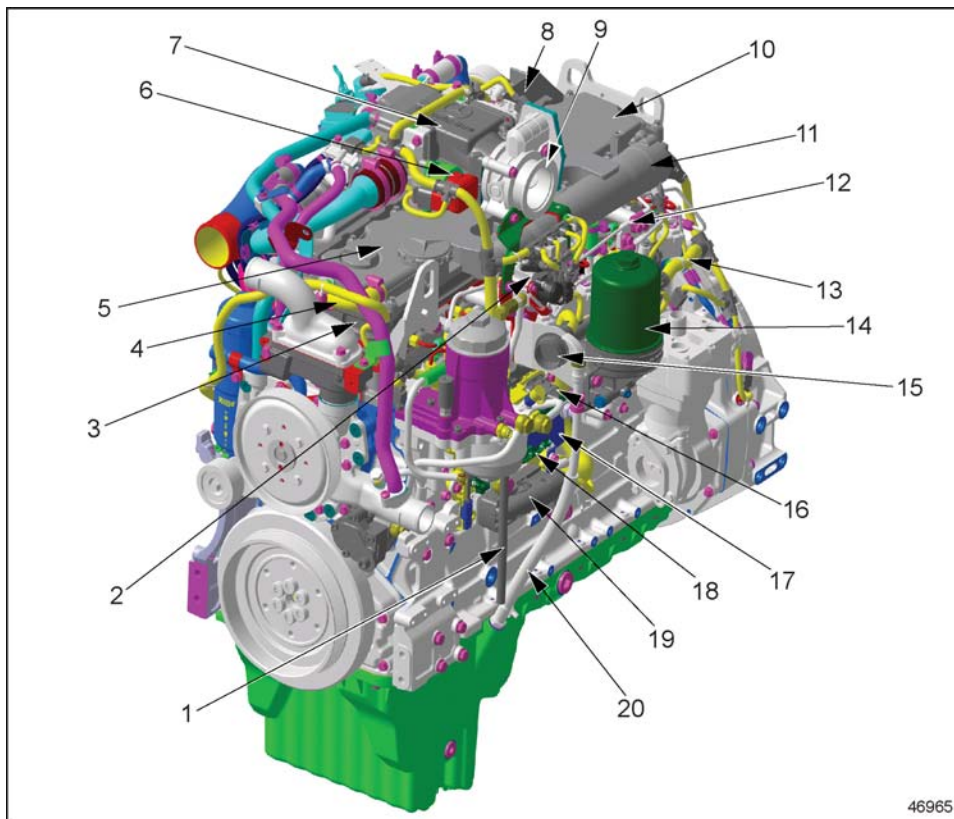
Right Side View of MBE 900 Engine (Single Stage Turbocharger) and Components
